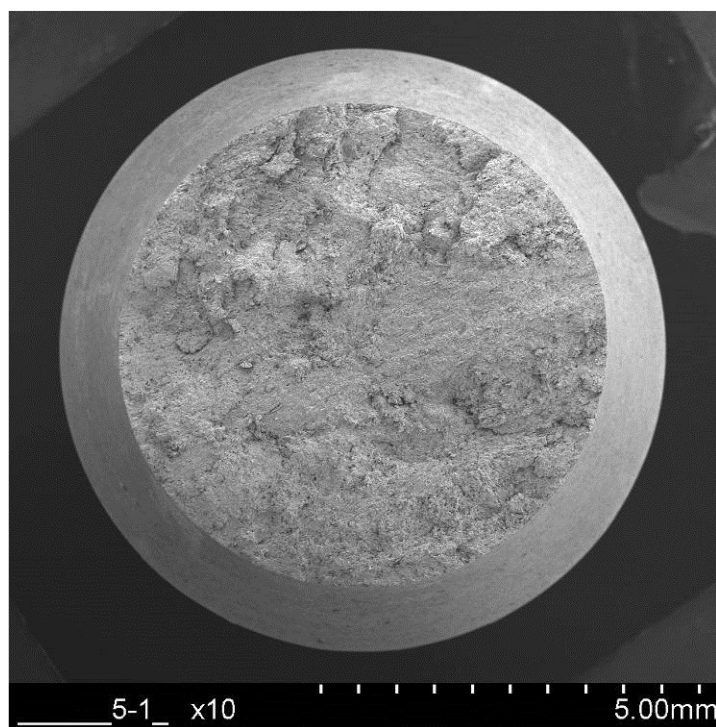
Fracture surface morphologies of $\phi 5$ tensile specimens.
